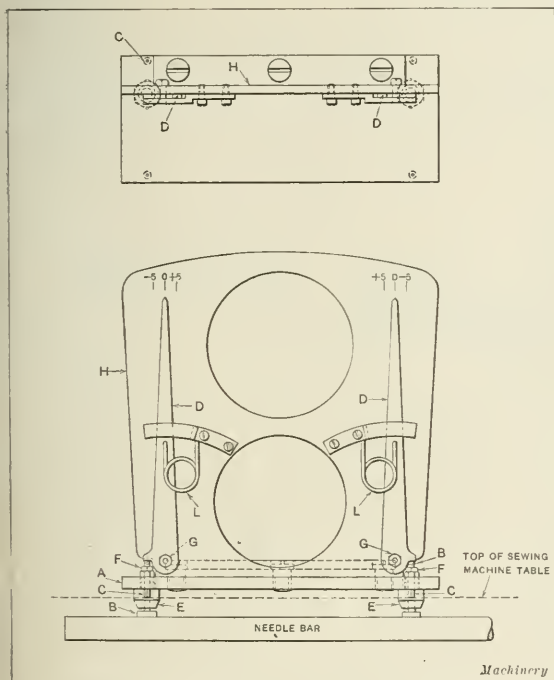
Indicating Gage for testing Parallelism of Shaft
